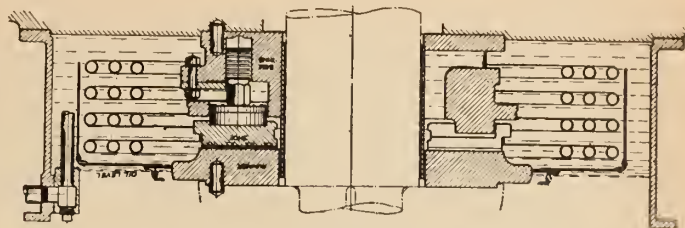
Cross-section of Thrust-Bearing with Segmental Shoe.
